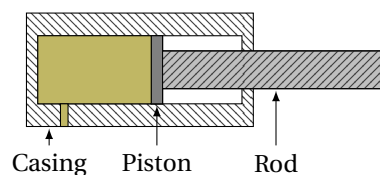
Nomenclature of a simple single acting cylinder. Three parts are distinguished; the casing, rod and piston. The casing contains the hydraulic fluid and is mounted, or hinged, to the surface. The rod is moving element used to transfer the loads, usually hinged. The piston is the elements that transfers the hydraulic force to the cylinder rod.
